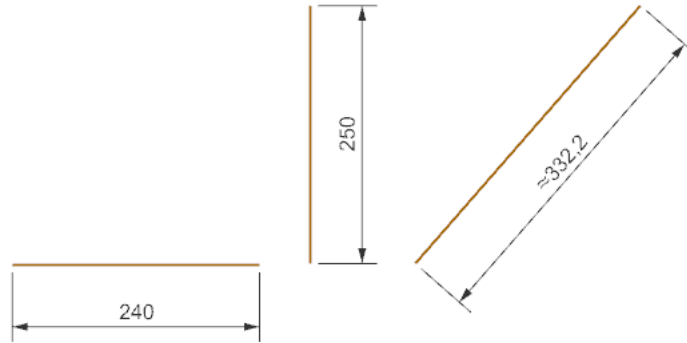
The linear dimension created for a horizontal line, vertical line, and an inclined line
